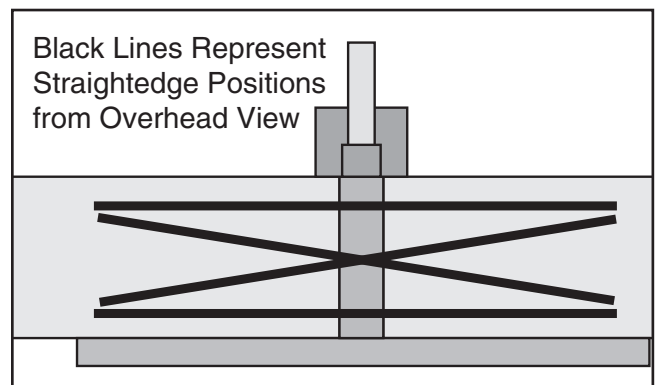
Straightedge positions for checking infeed/outfeed table parallelism.
